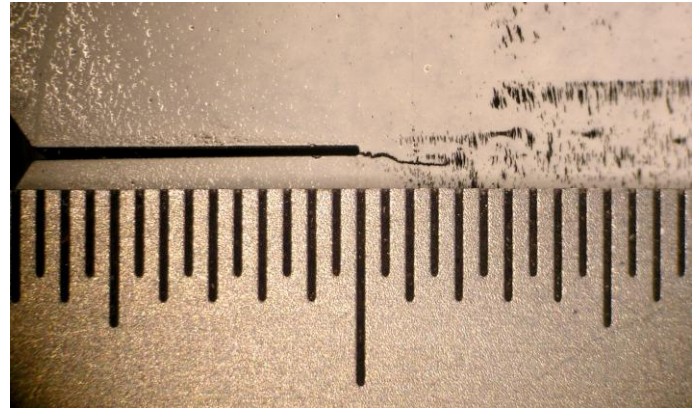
Fatigue crack marked by MPI at the specimen surface.
